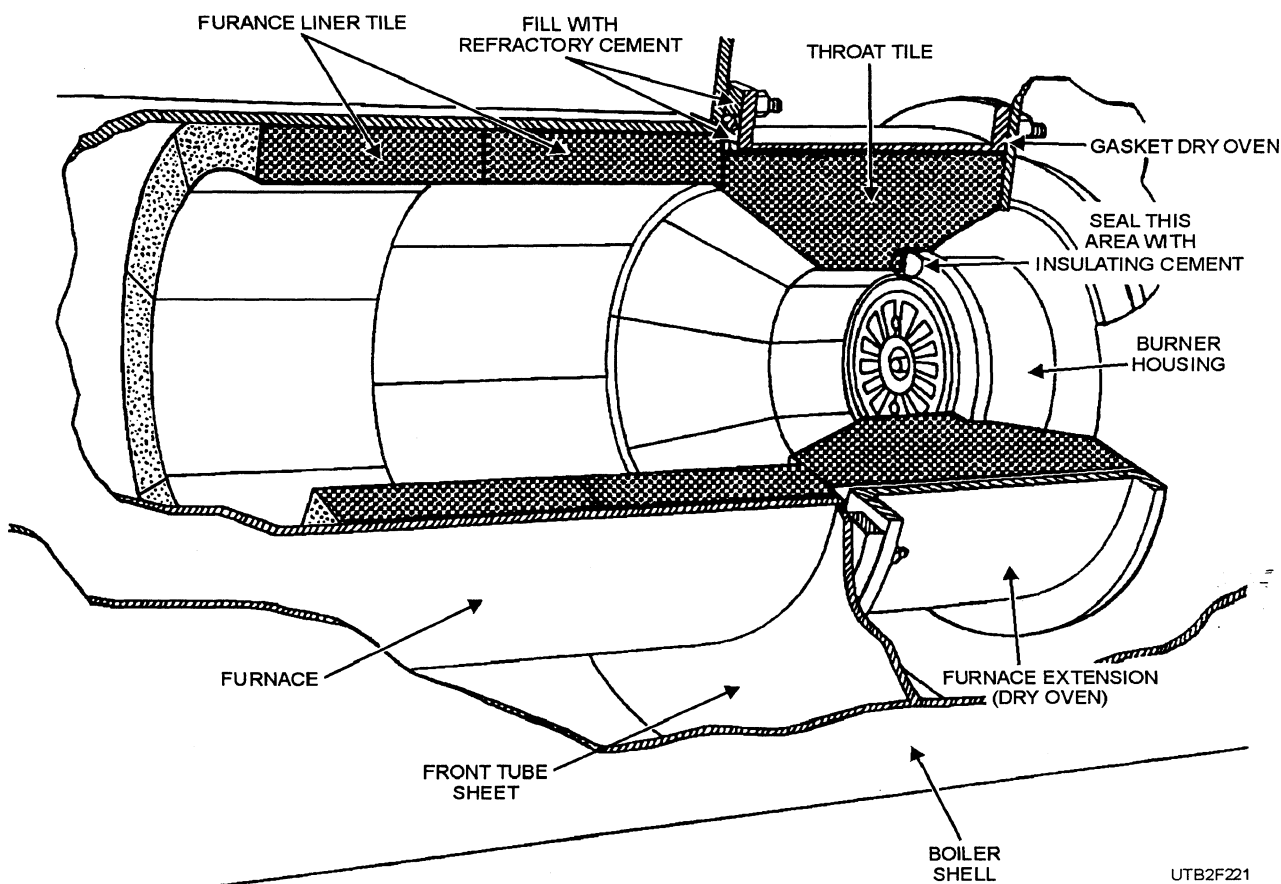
Furnace liner refractory—125-150-200 hp.
